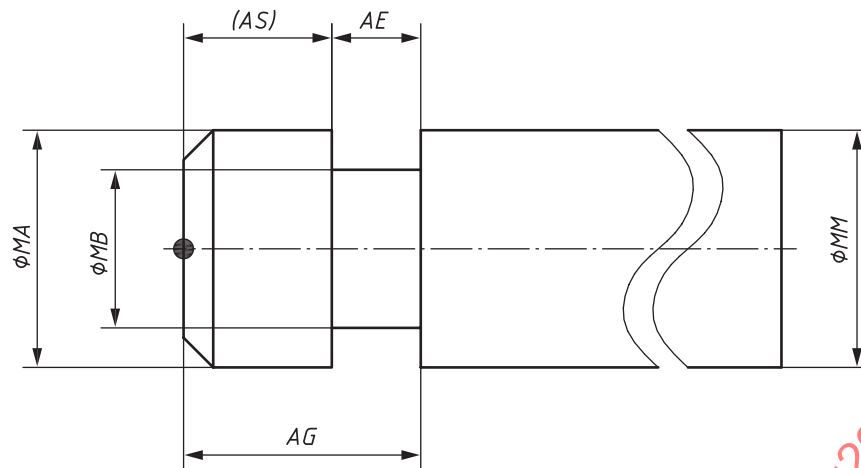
RFE_x — Grooved piston rod end with TRP at the end of the piston rod
